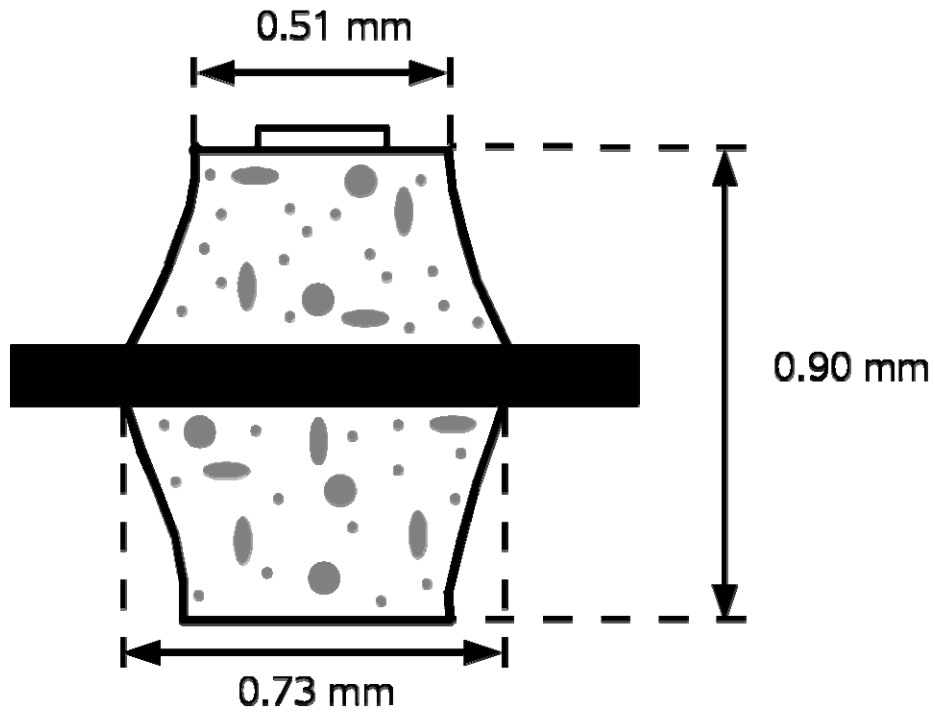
Illustration of elastomer contact, showing dimensions. Gray shapes inside of contact represent Ag particles. Black horizontal region at center of contact represents insulator
